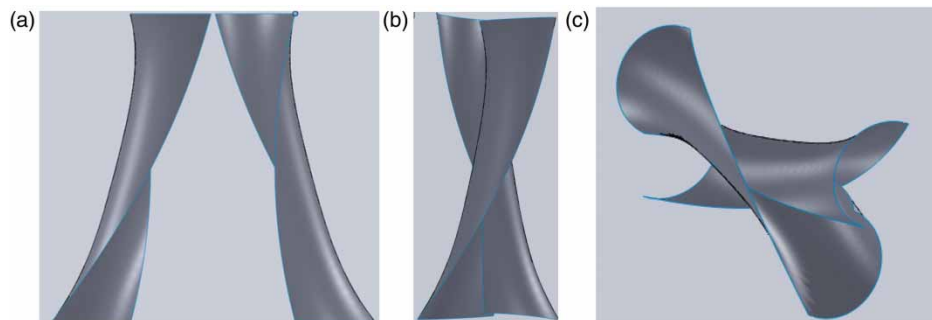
Blades assembly on CAD: (a) Twist blades, (b) Blades assembly, (c) Second view blades assembly.
